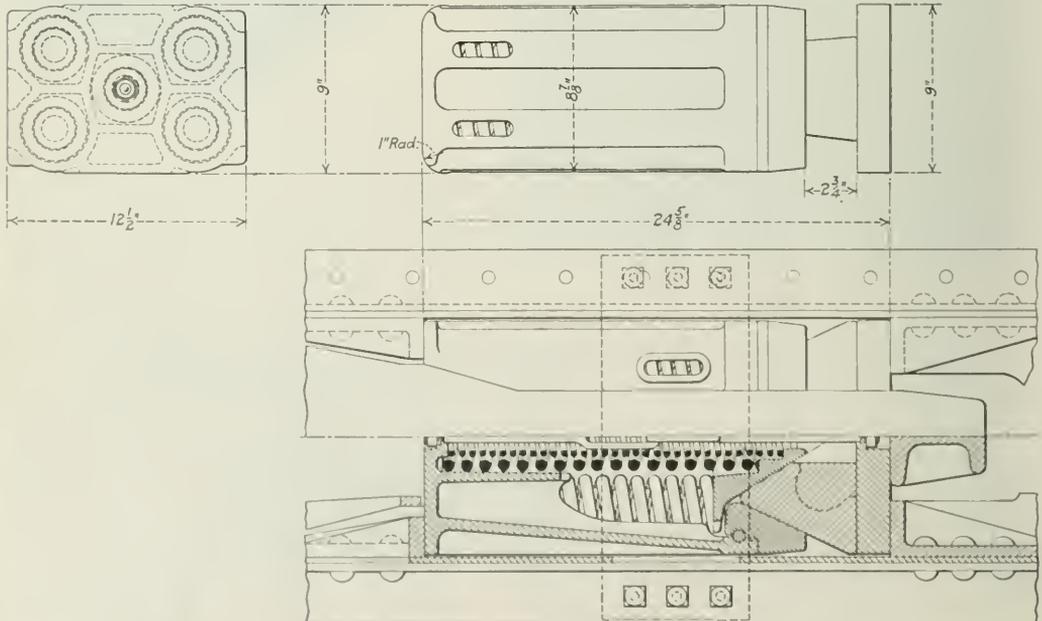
Sessions-Standard Friction Draft Gear, Jumbo No. 2
